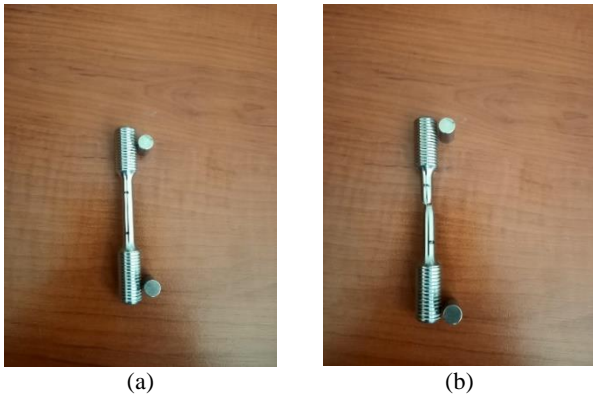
Macrophotographs of a tensile test sample (a) before and (b) after the test.
